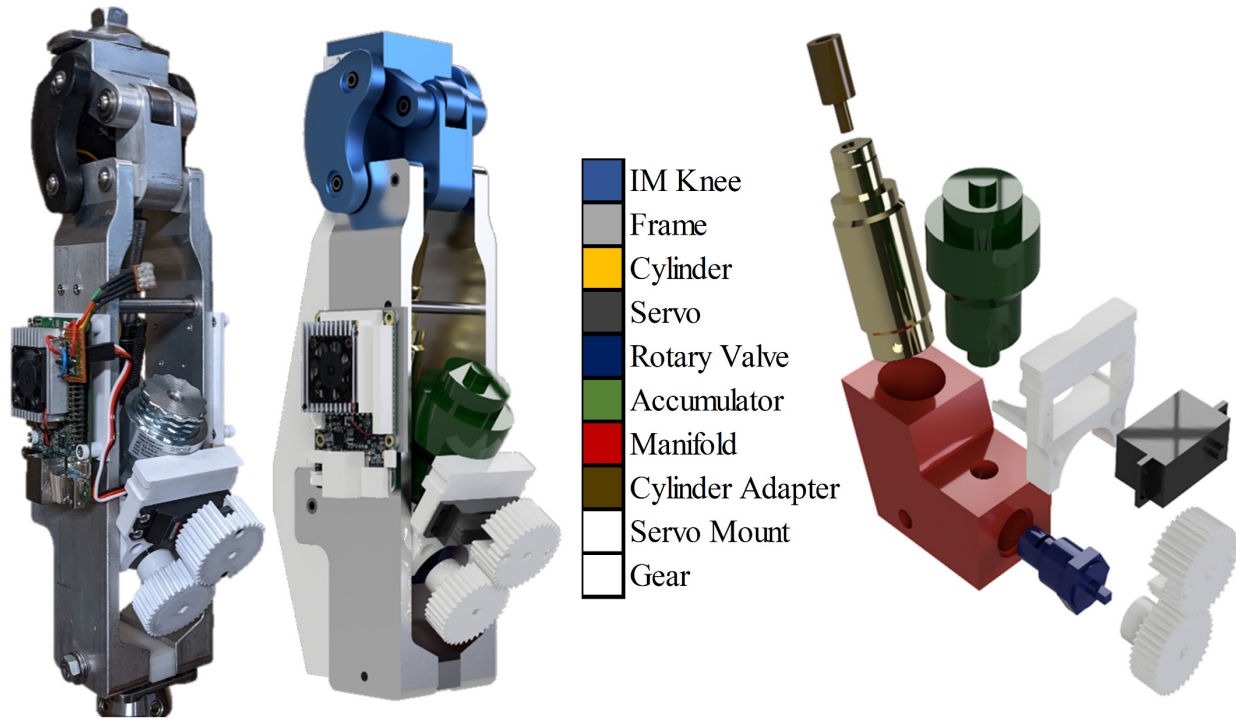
Assembled prototype 2 (GKnee) system. Left shows actual assembly. Middle and right show rendering of the full assembly and the hydraulic system in detail, respectively. A legend is included to label the various components.
